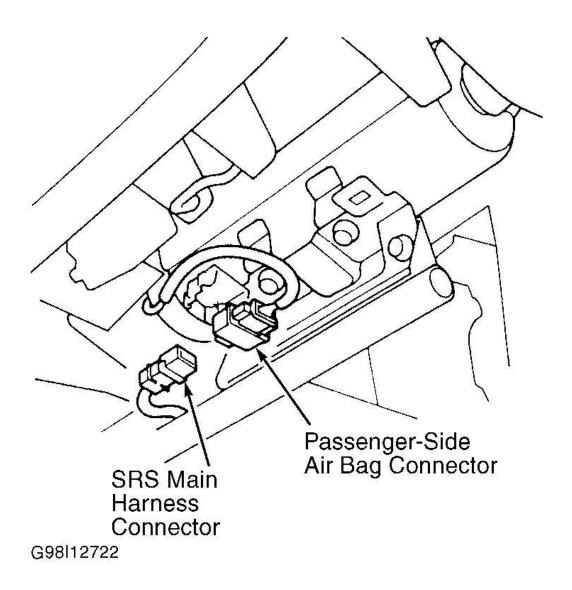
Locating Passenger-Side Air Bag Connector (Typical; Except 3.5RL) Courtesy of AMERICAN HONDA MOTOR CO., INC.
